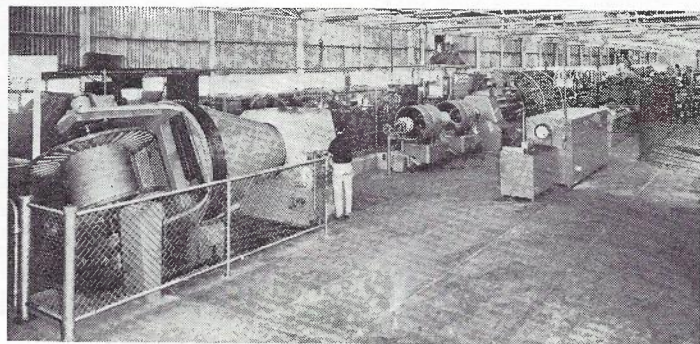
Plastic Cable Unit Bunching and Cabling Machine.
